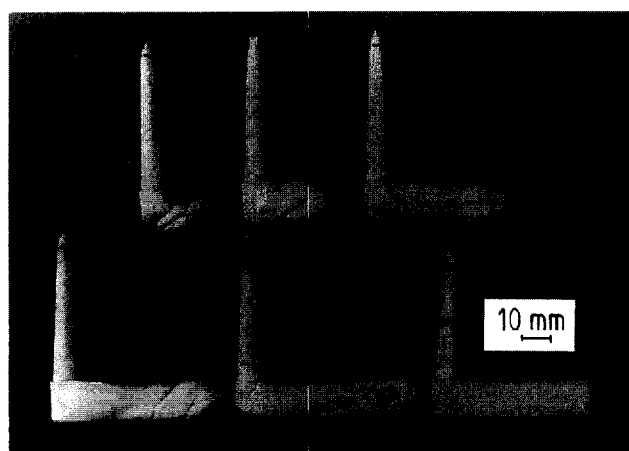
Mould filling behaviour during injection moulding; the samples were formed in separate short-shot injection experiments.
